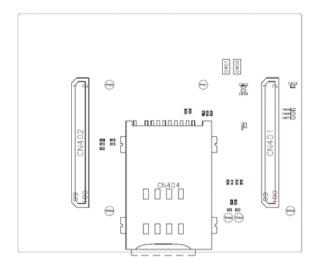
AirPrime SL80xx Socket Board (Bottom View)
